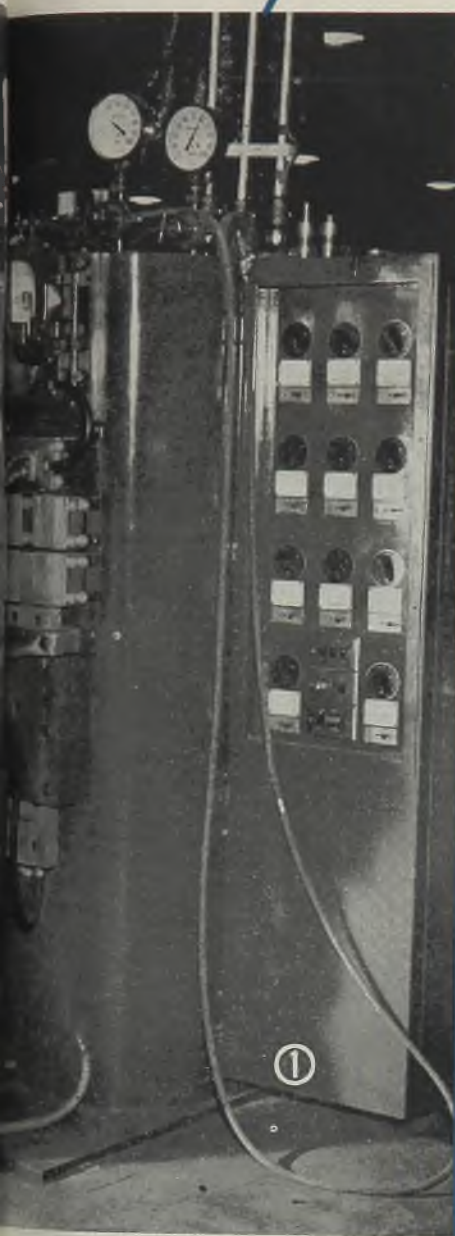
This three-phase to single-phase welder has been used by Douglas Aircraft for almost a year spot welding heavy gage armor plate. Rated 140 kva, unit preheats material before welding; has adjustable quenching; combines welding with austempering, grain refining and tempering heat treatments—all in same cycle. Variable pressures up to 12,000 pounds are available at the electrodes for forging the weld
